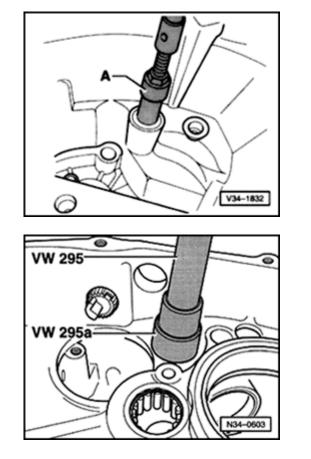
Removing bushing for 3rd and 4th gear shift rod
